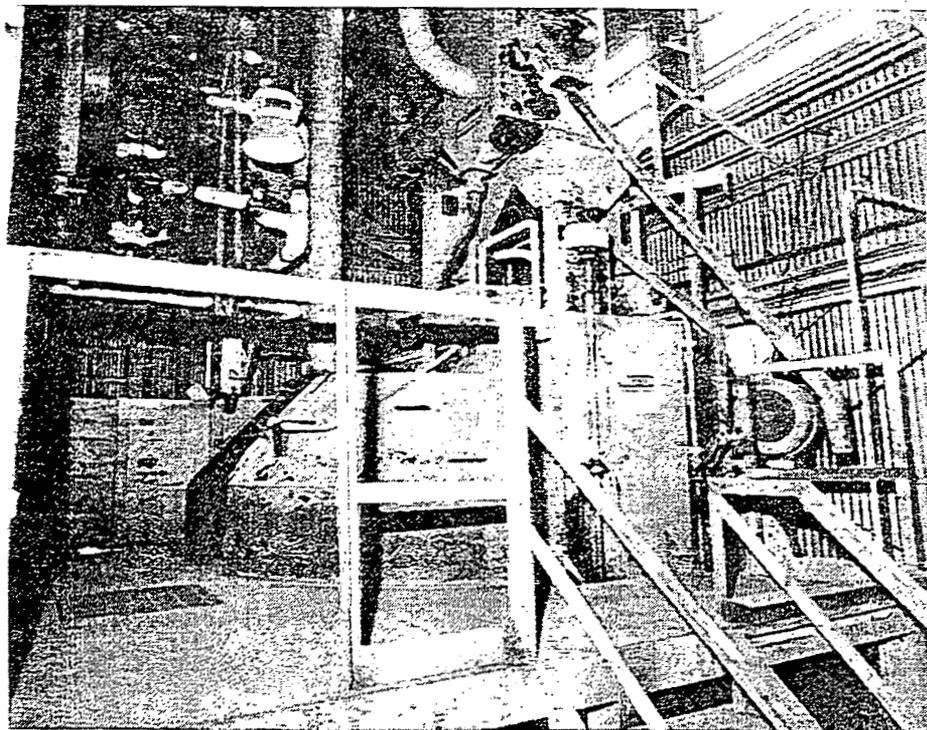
Building 66 - Bake Oven, SW Corner
